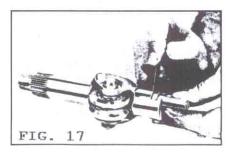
Checking Sector Shaft Lash Adjuster End Clearance
